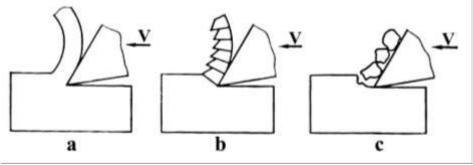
The basic types of chip: a – flowing; b – shearing; c – tearing
